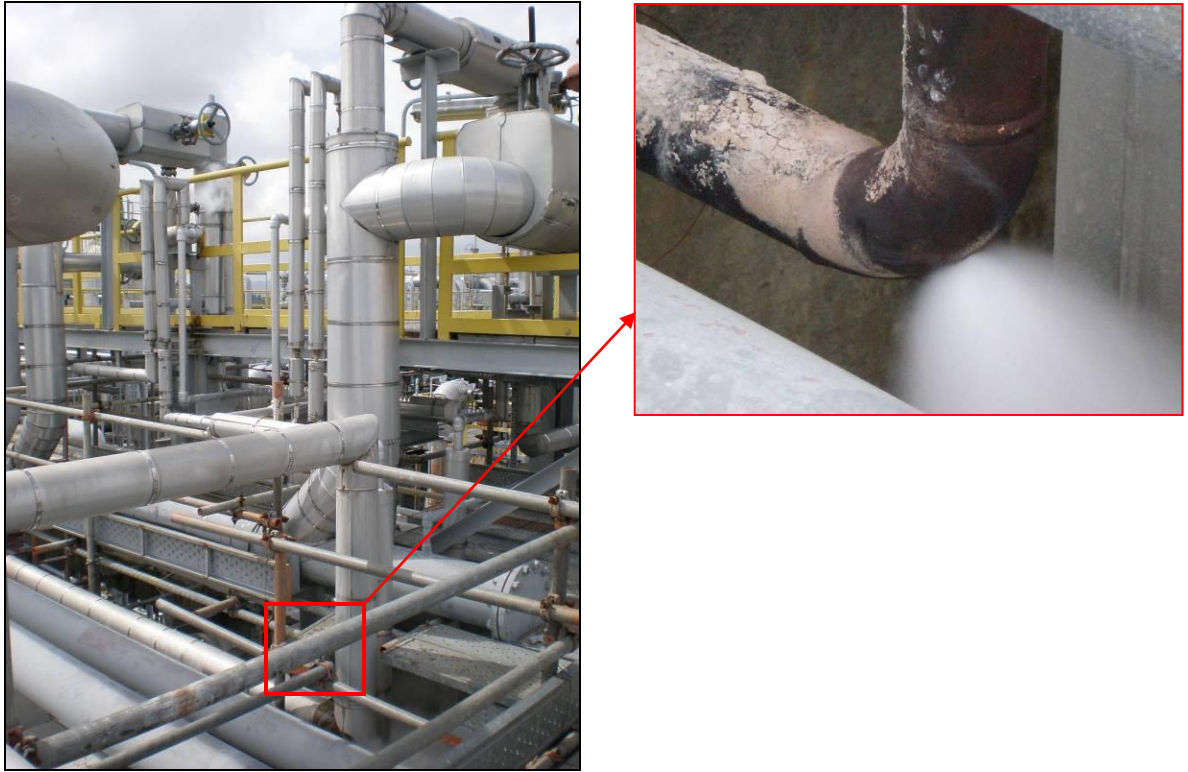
The Actual Case of Small Bore Piping Failures for elbow pipe
